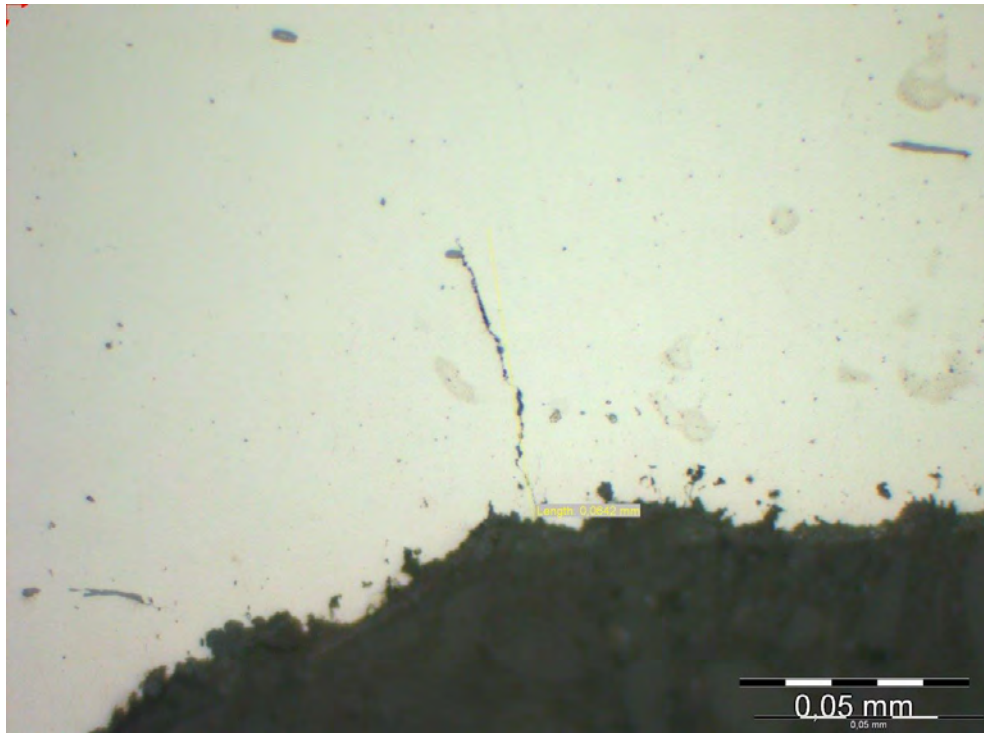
Crack at segment C, second ridge on barrel no. 1613
